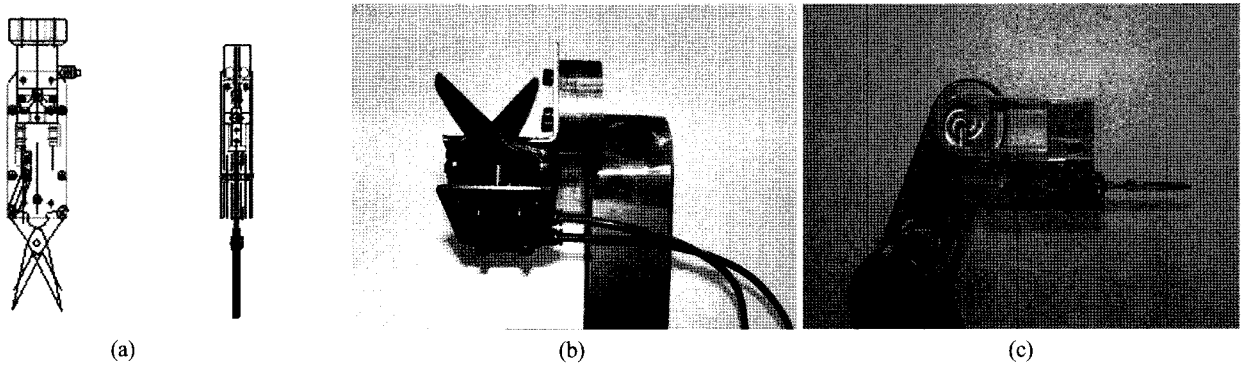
Drawing of cutting knife for pruning and developed pruning tool.
